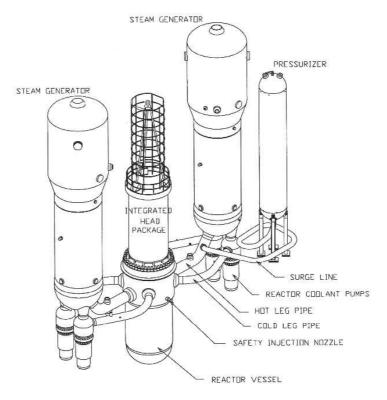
Steam generator assembly of AP1000 (Printed with permission from [47]).
